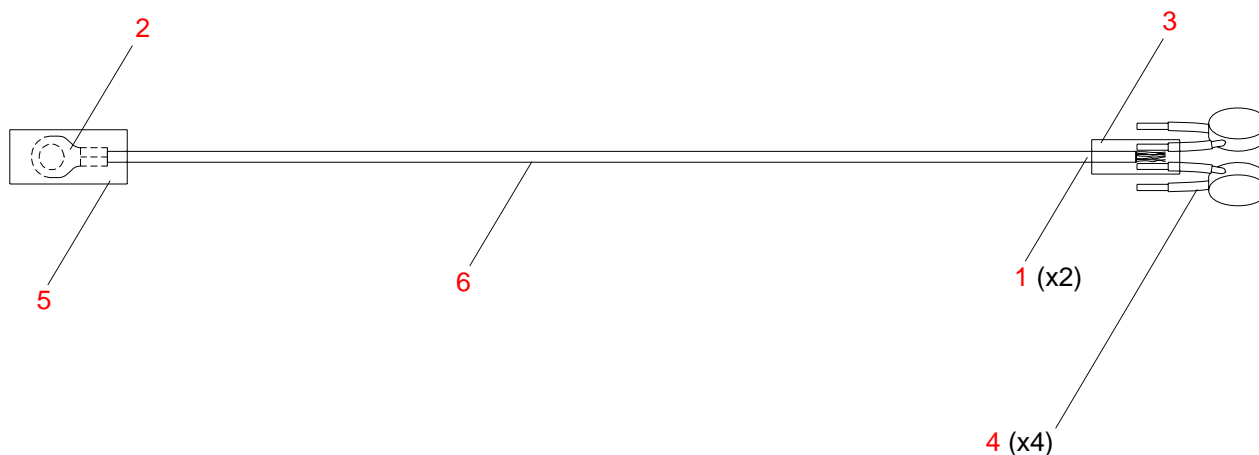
Yoke Lamp Cable Assembly (VL500 80V)
